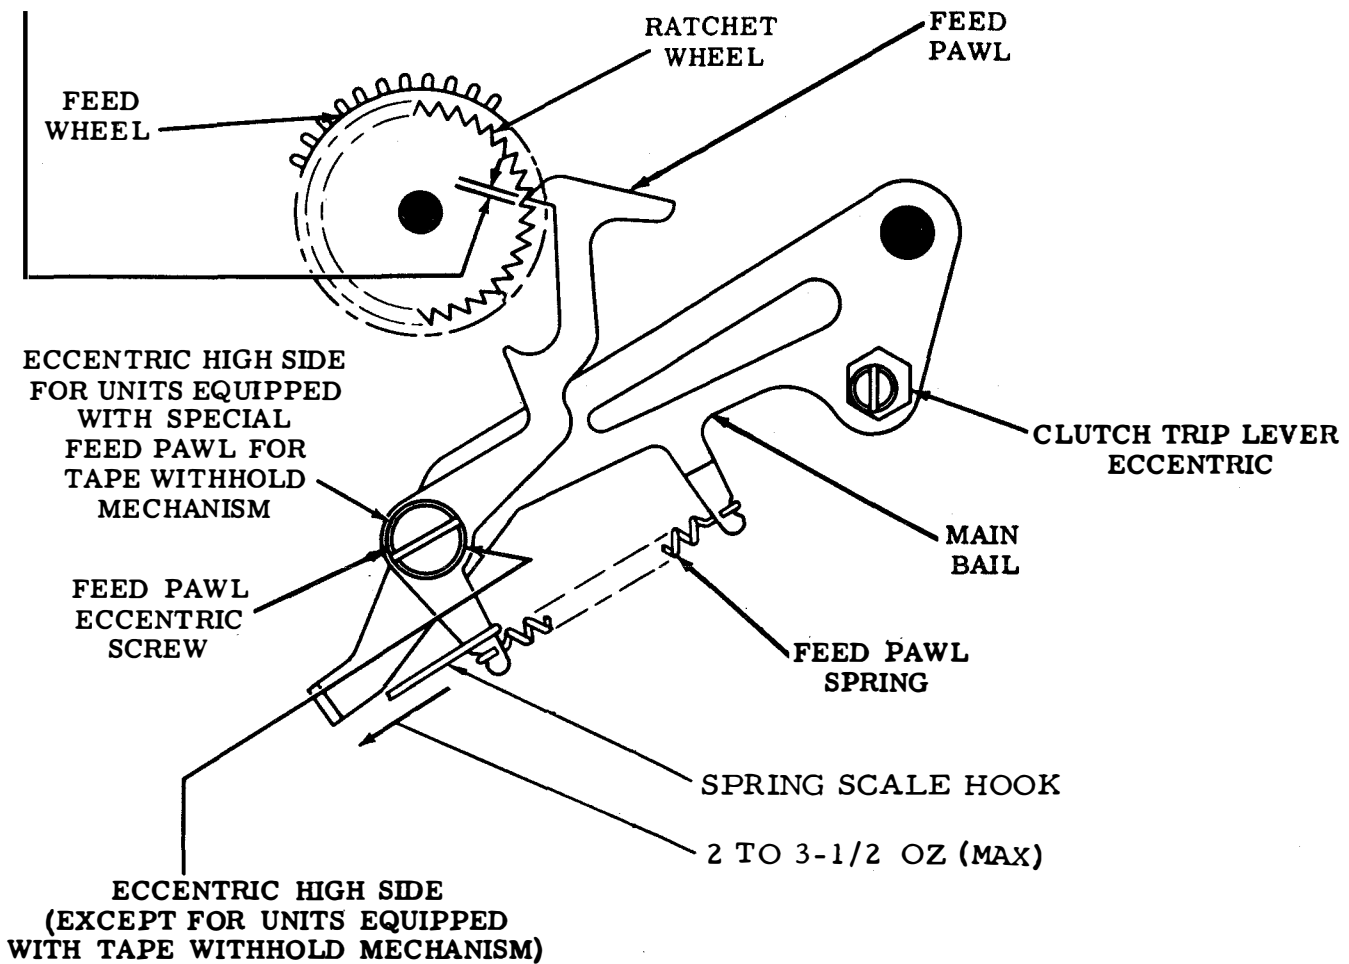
Feed Pawl and Feed Pawl Spring, Rear View
